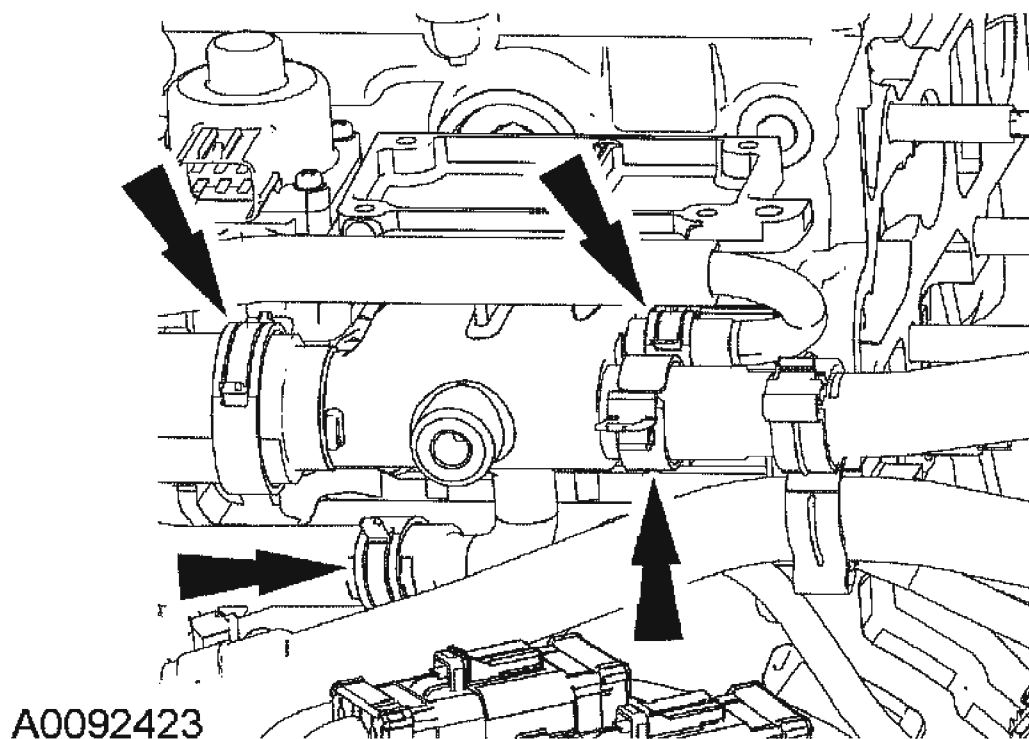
Connecting Coolant Hoses Onto Coolant Bypass
